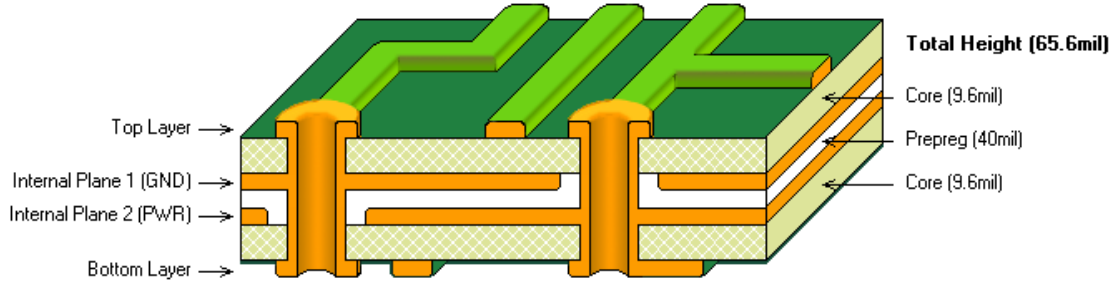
The PCB Layer Stack Used on the PGRBR PCB.
